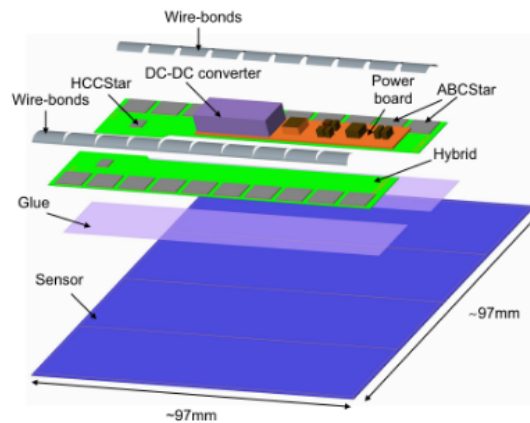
Exploded view of a short-strip barrel module with all relevant components. Long-strip modules and end-cap modules feature the same component groups. Figure taken from [22].
